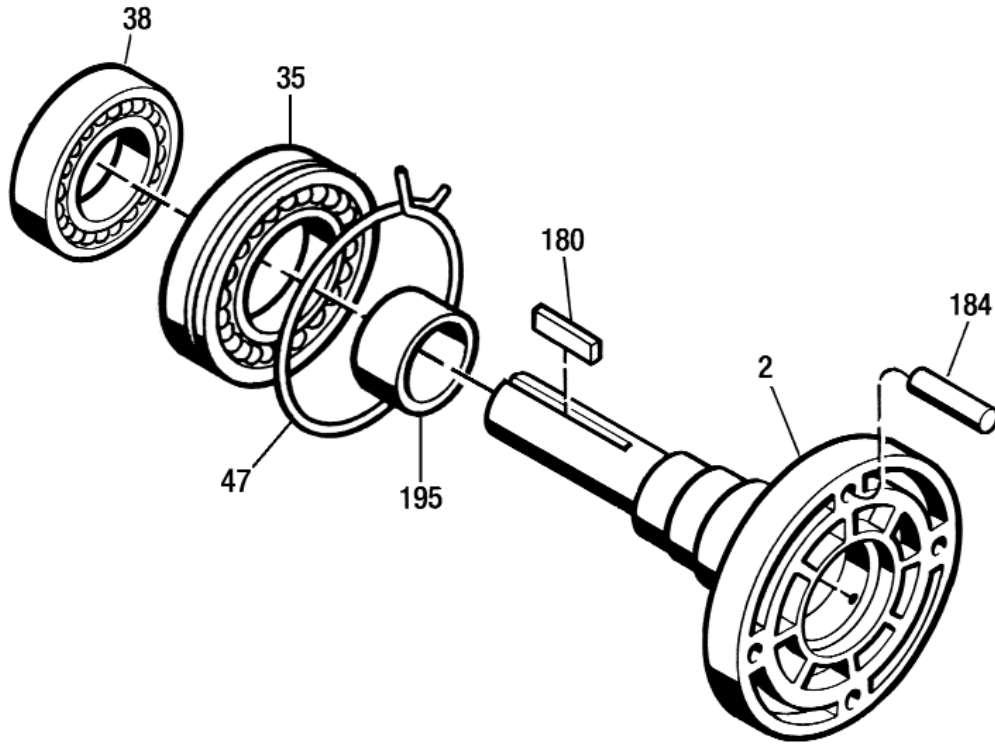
Piston Housing & Retainer Sub-Assembly
